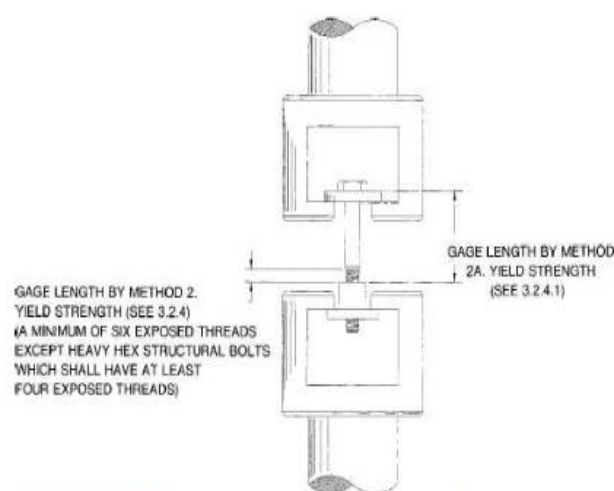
Tension Testing of Full-Size Bolt (Typical Set-Up)
